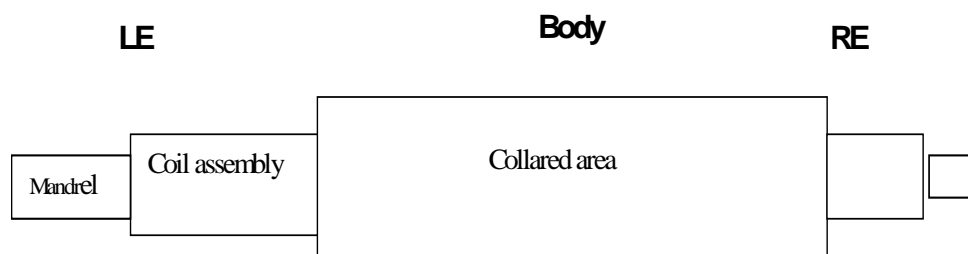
Collared coils with coil assembly on the mandrel.
